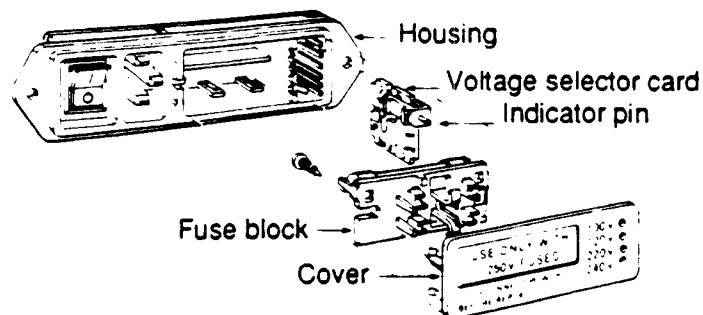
Fuse plate, fuse block, and voltage card assembly.
